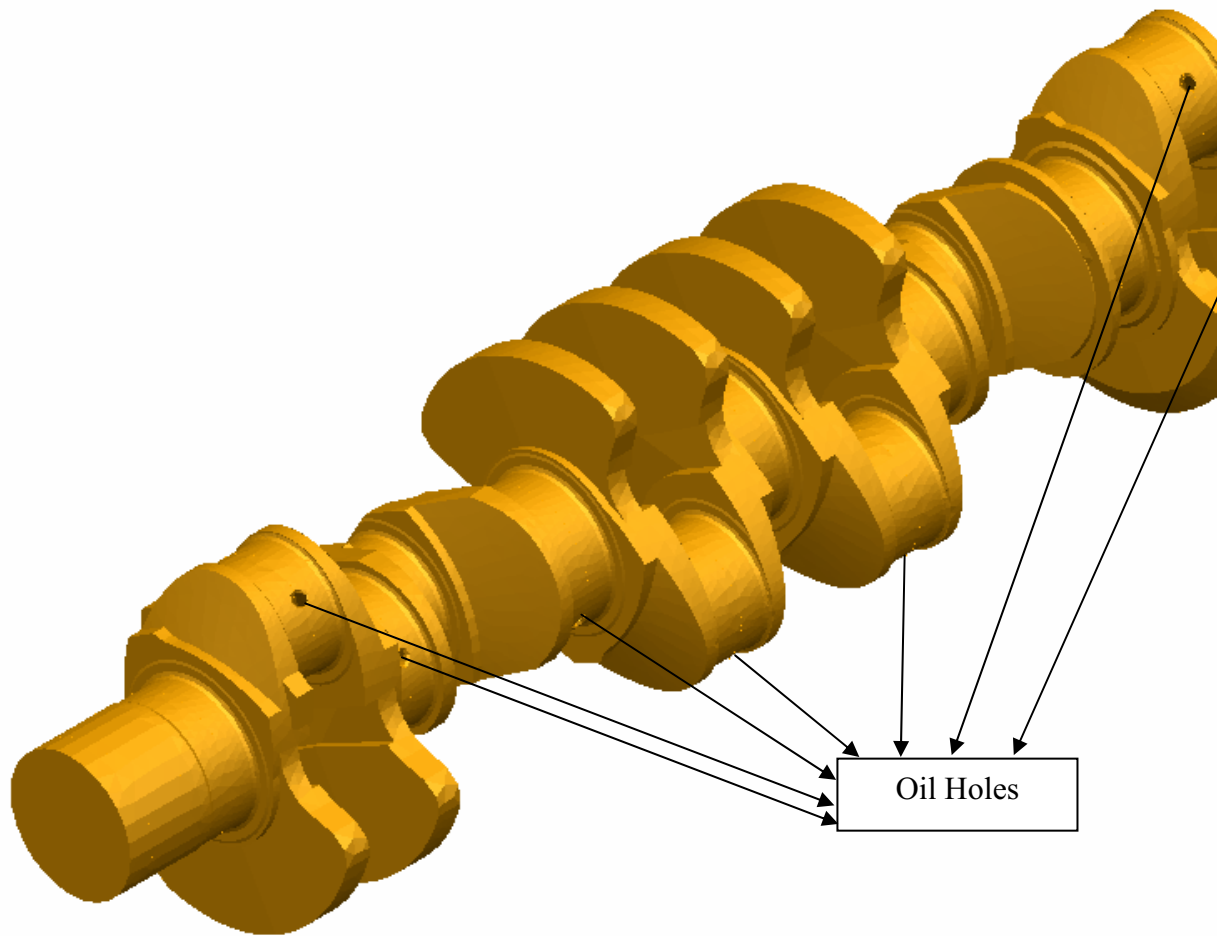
Flexible crankshaft model for the crankshaft with oil holes
